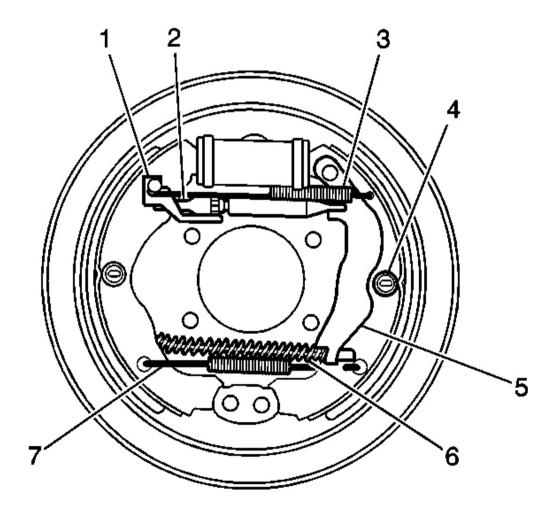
View Of Brake Components Courtesy of GENERAL MOTORS CORP.
